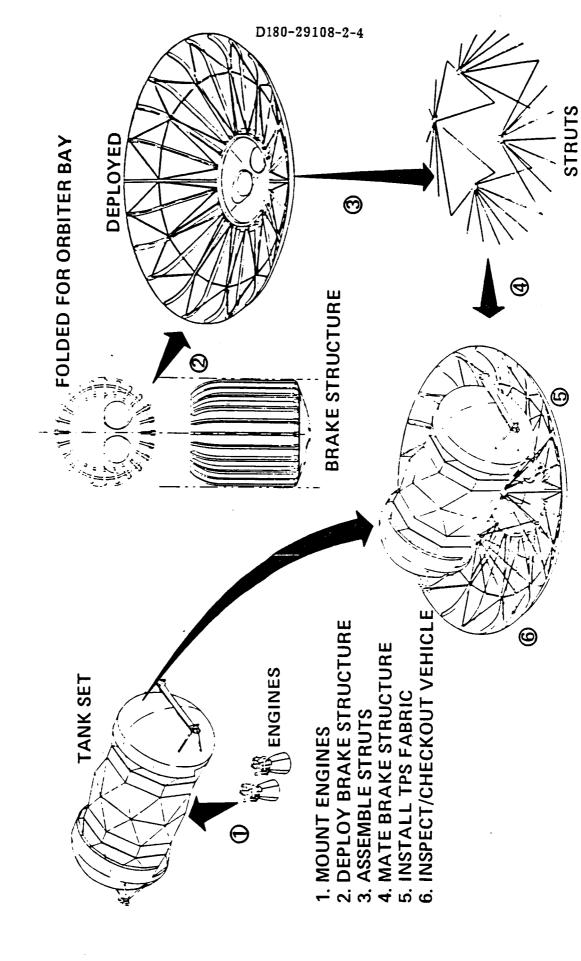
Lifting Brake Assembly Sequence
